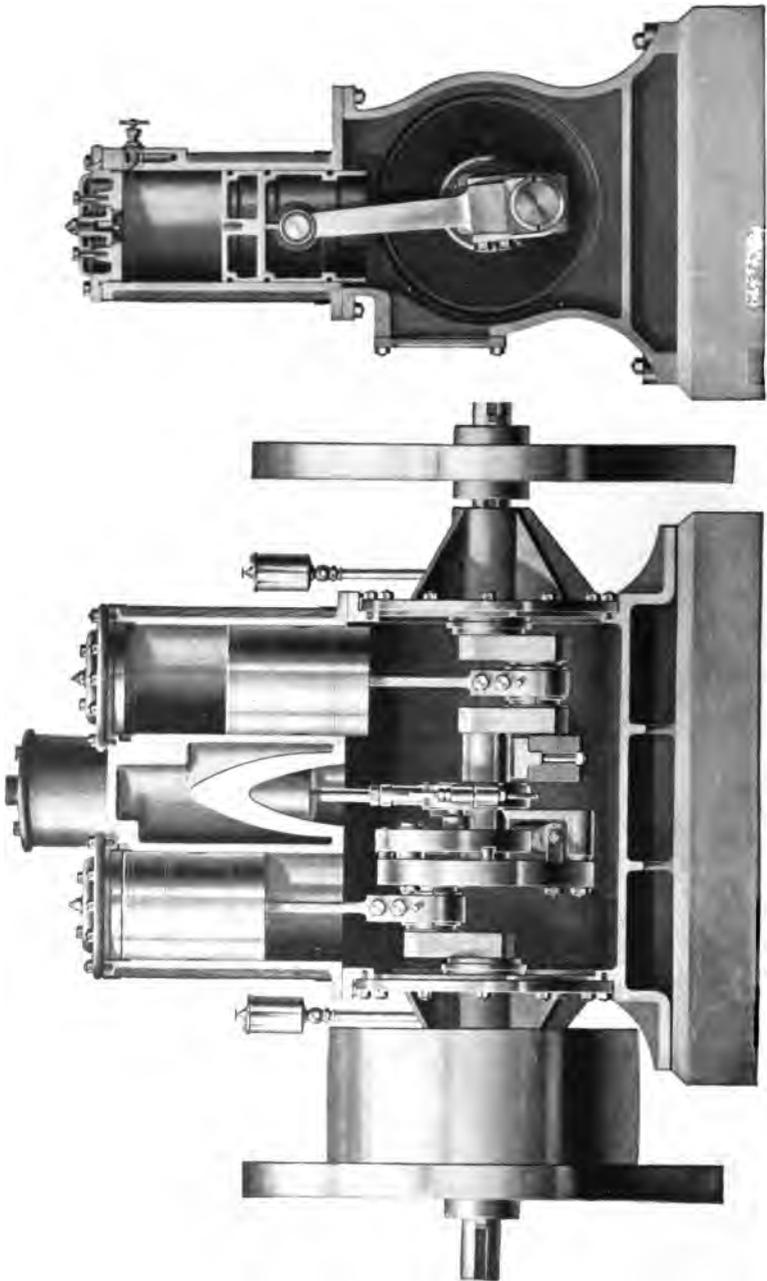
LONGITUDINAL SECTION THROUGH CYLINDERS.
